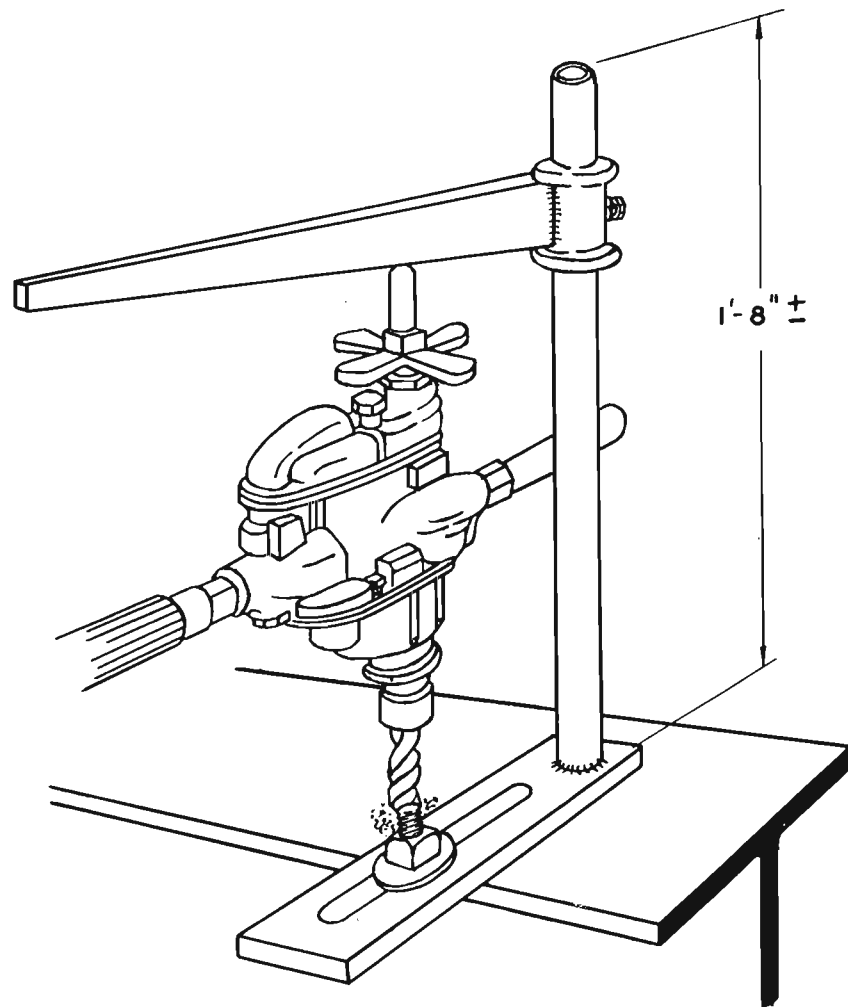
Adjustable clamp or "old man" used when drilling steel with pneumatic drill. A drill bar may be used instead.
